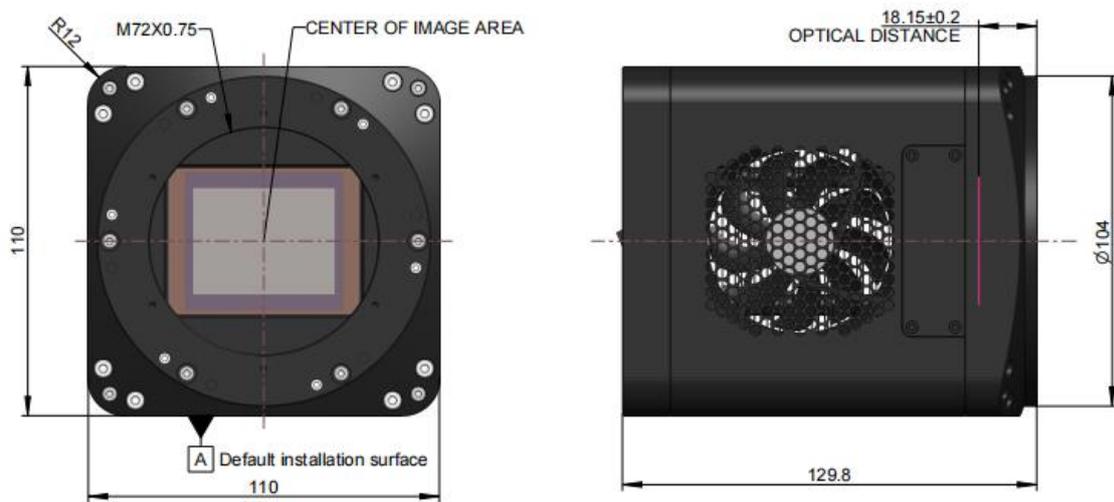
MaxCam-461M/C-TE dimensions (mm)
